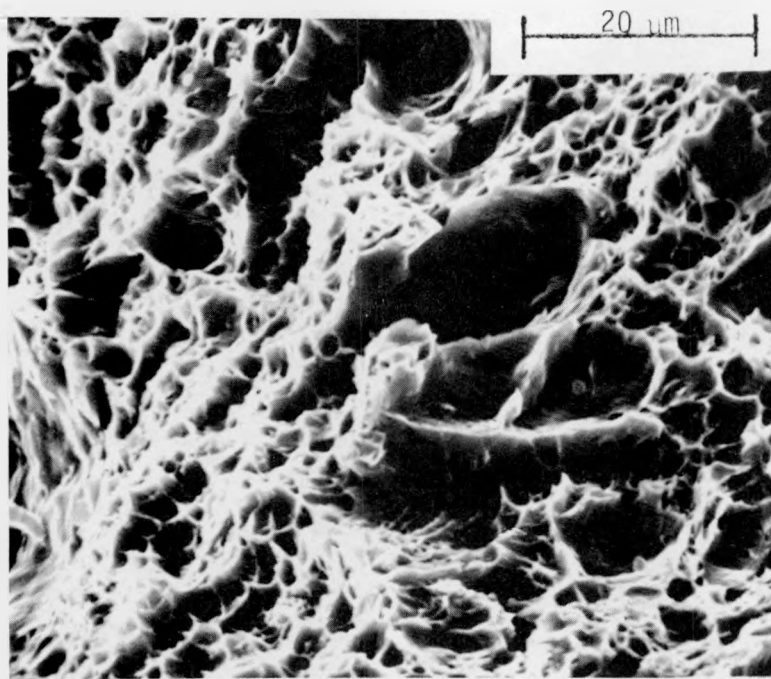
Characteristic ductile dimple type fracture exhibited by an unexposed smooth-bar tensile sample of 2 1/4 Cr-1 Mo.
